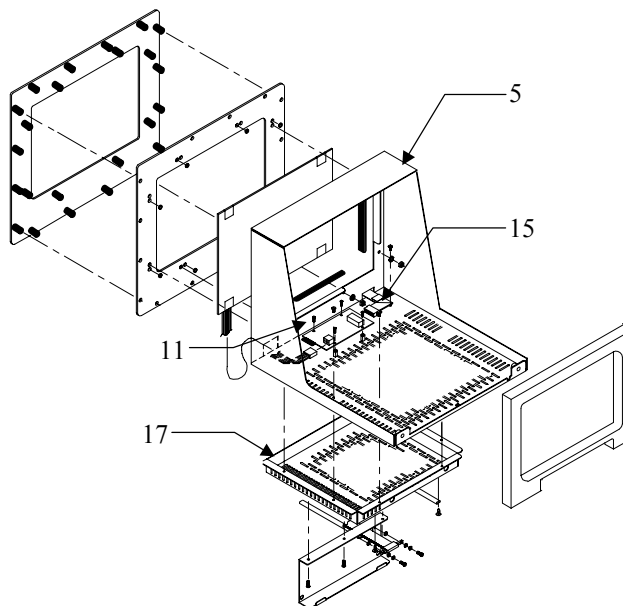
PanelMate Power Series 4000 Touchscreen Unit (Model 4500) Assembly View
